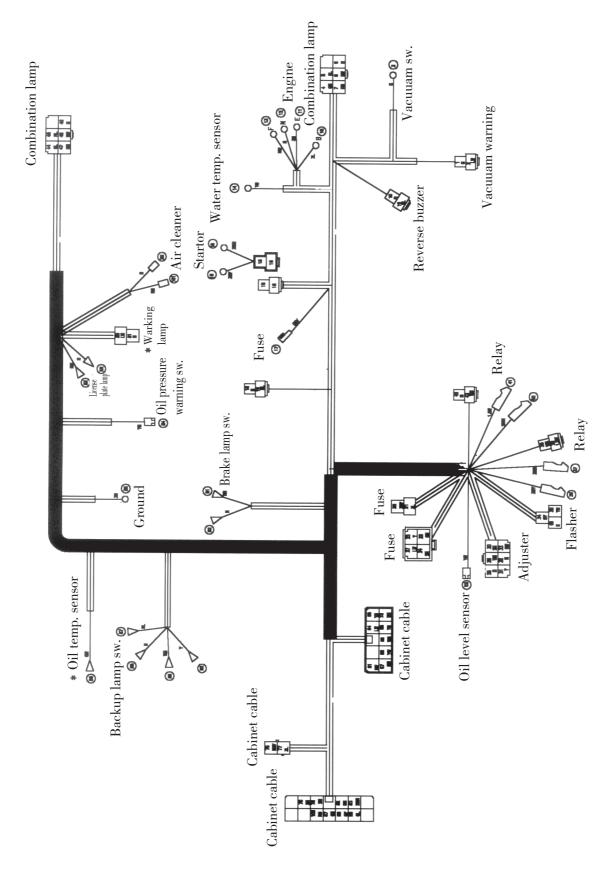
Engine wire harness. CPCD50-60-WF -39-
